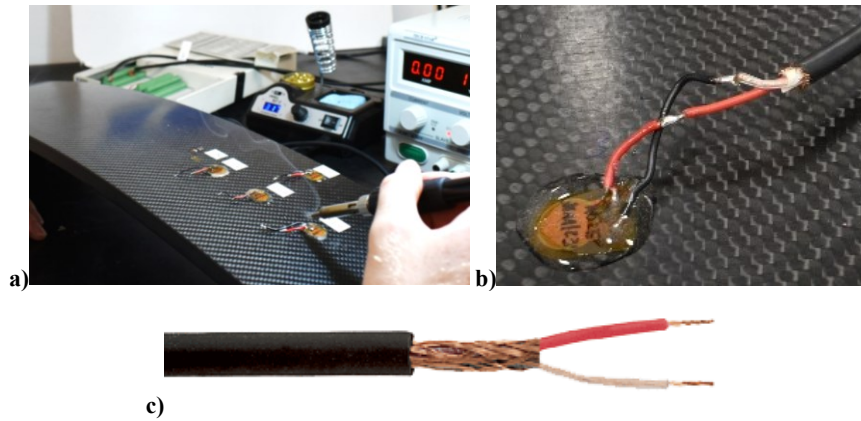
a) Soldering of piezo patches, b) detail of the short cables, c) detail of the shielded cable
